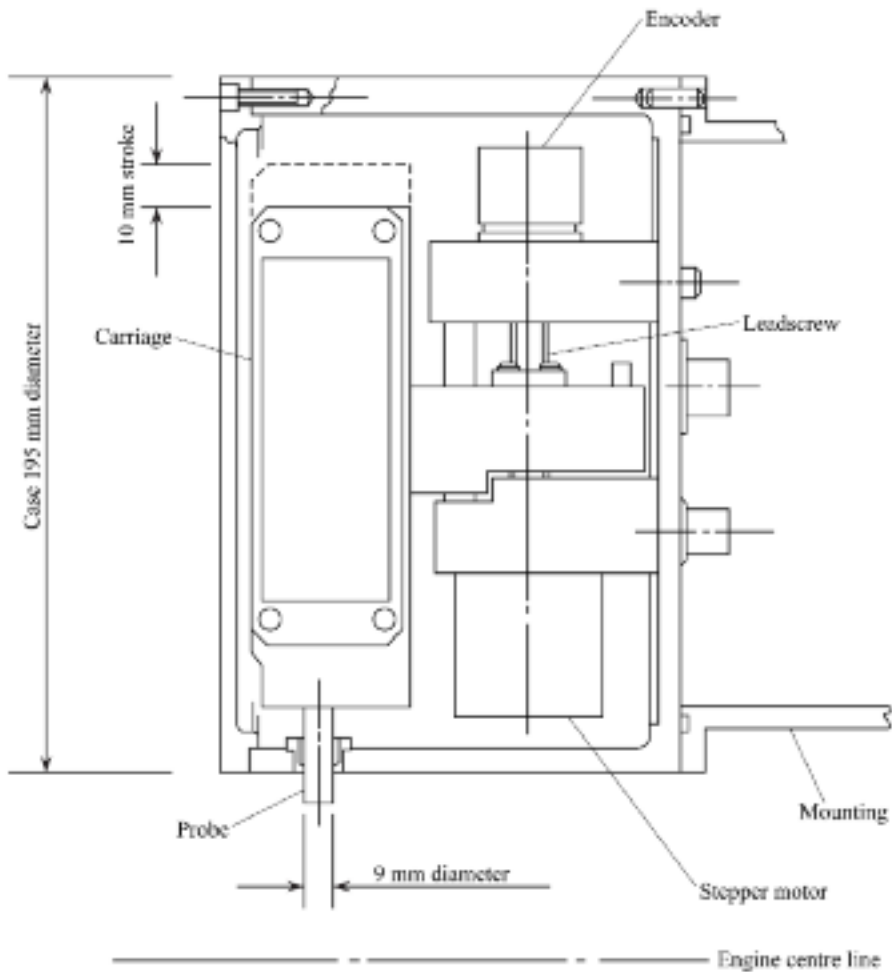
Layout of the measurement head designed for measuring radius of individual rotor and stator blades during their machining, developed by Sheard *et al.* (1992).
